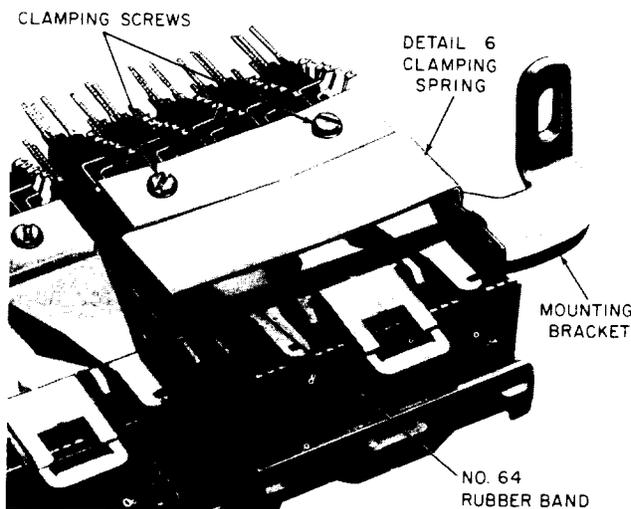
Clamping Spring and No. 64 Rubber Band in Place on Half of Relay
